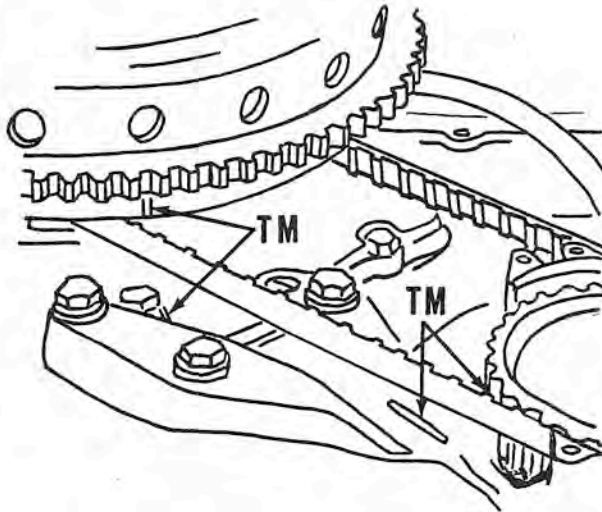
To time the distributor, align the fly-wheel timing marks (TM), then align the marked pulley tooth with scribe line on mounting bracket as shown.
